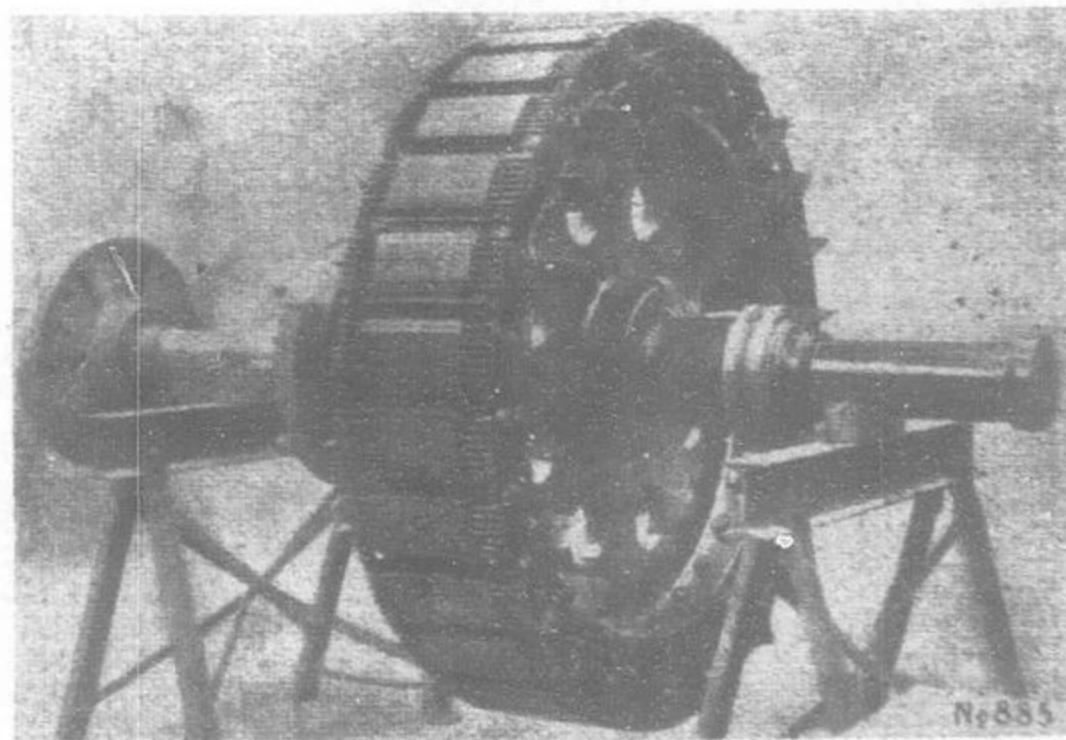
Magnet wheel for a 325 kw. Alternating Current Generator
